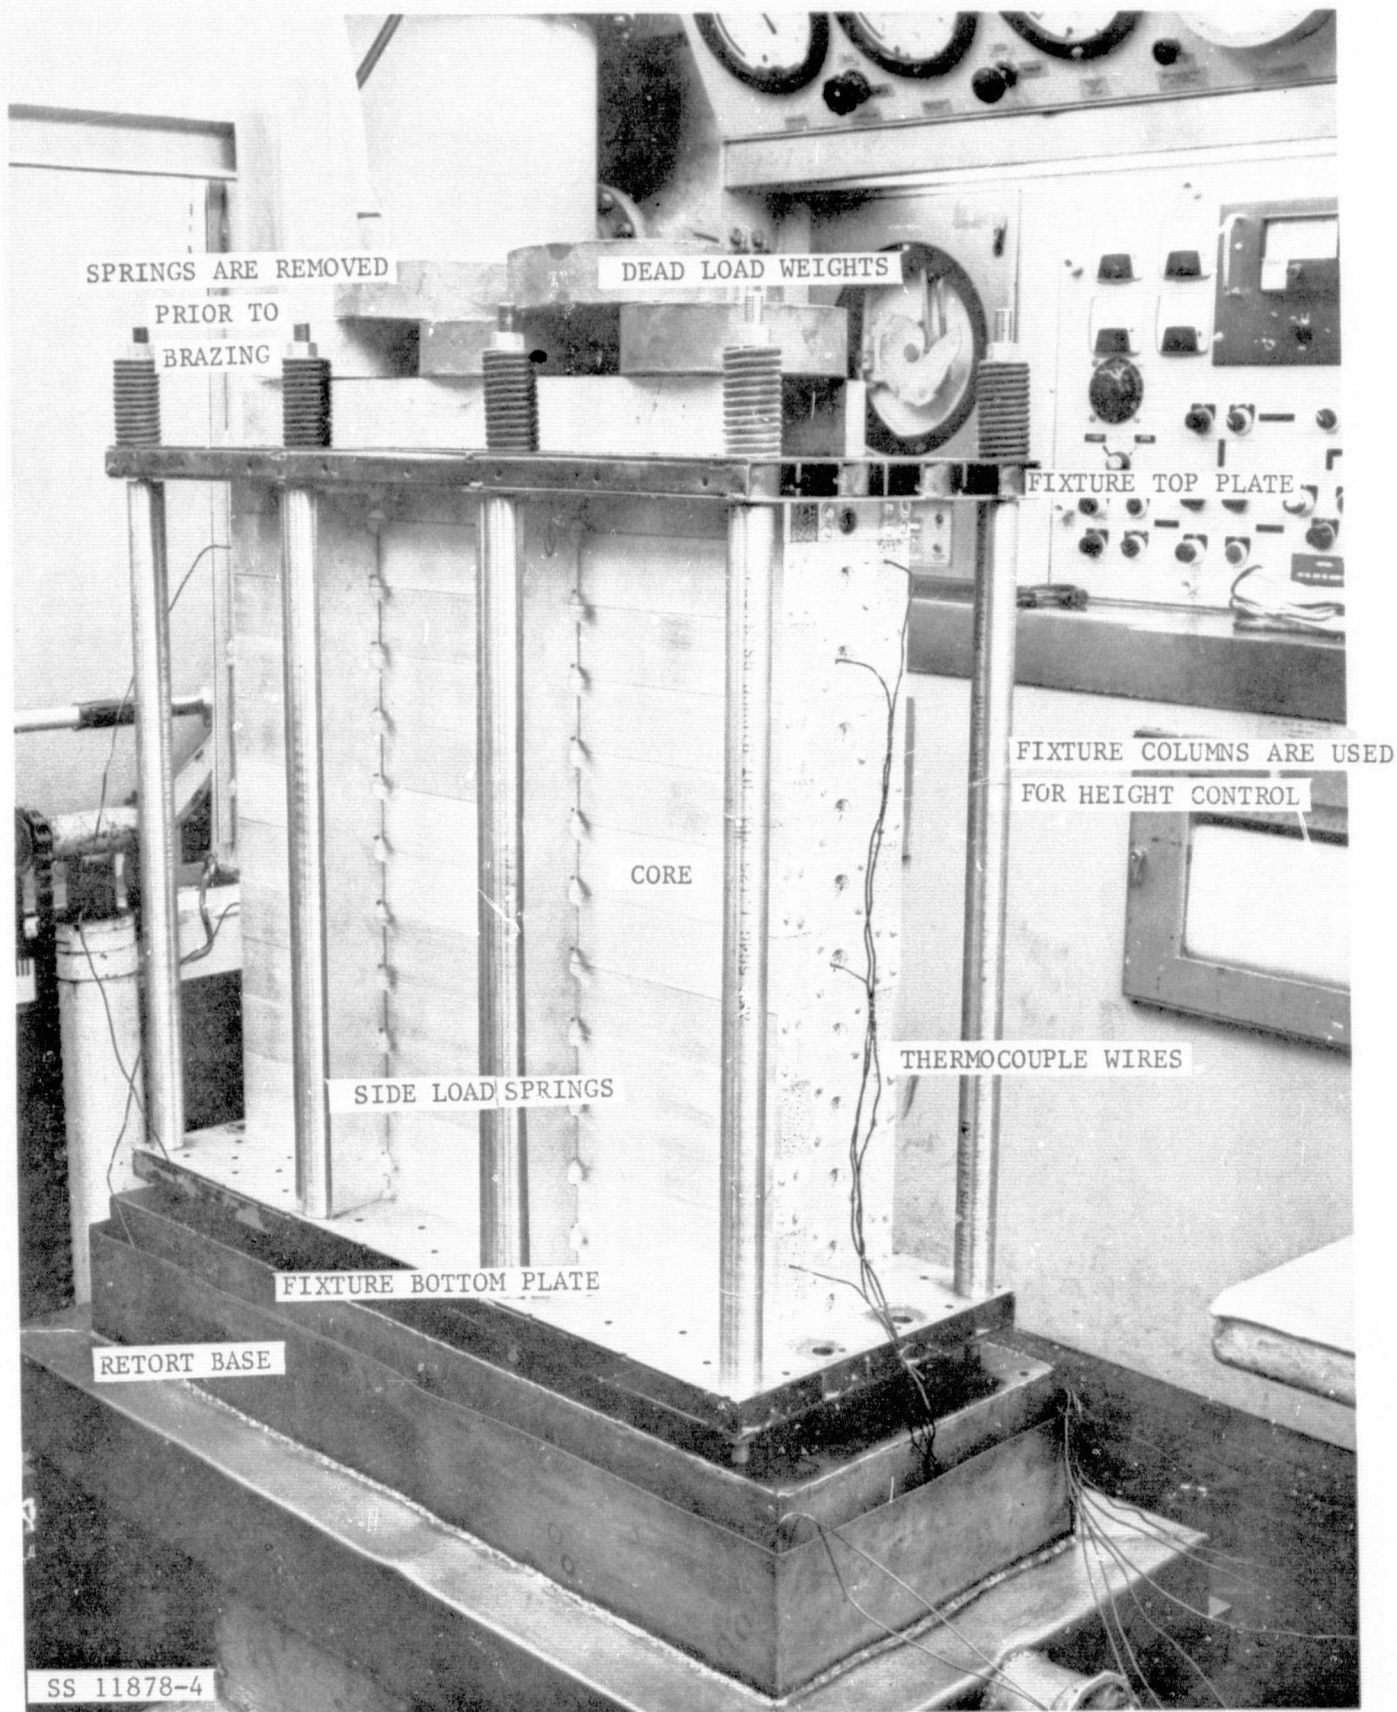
THE BREADBOARD CANISTER CORE PRIOR TO BRAZING
